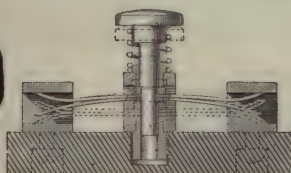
Sectional View of Fig. 2534. Showing Operation of Key.
